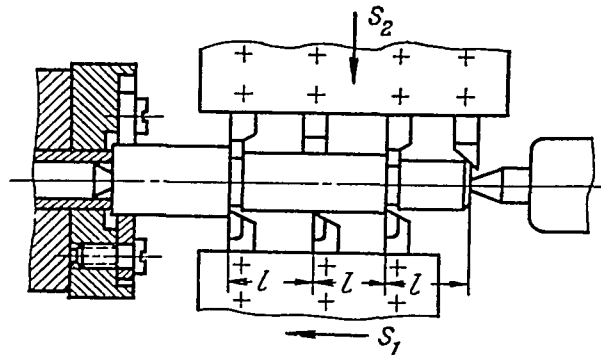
Setup for turning a stepped shaft in a multiple-tool lathe
